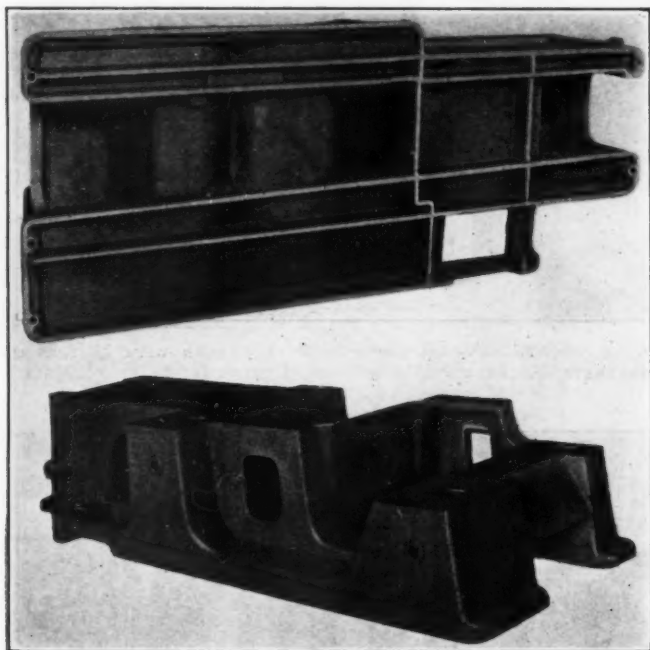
BASE OF ELECTRIC MOLDER. ABOVE: BOTTOM VIEW SHOWING HEAVY RIBBING; BELOW: ELEVATION
